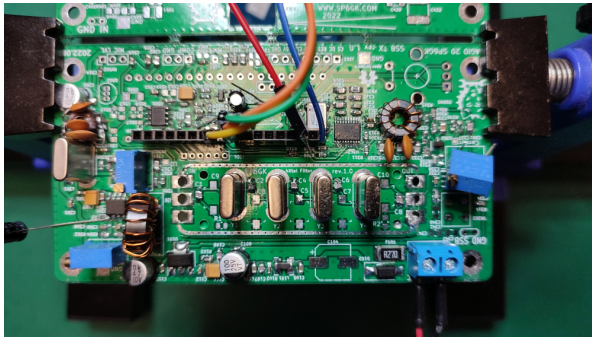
Assembled exciter PCB, only prototype revision was assembled
